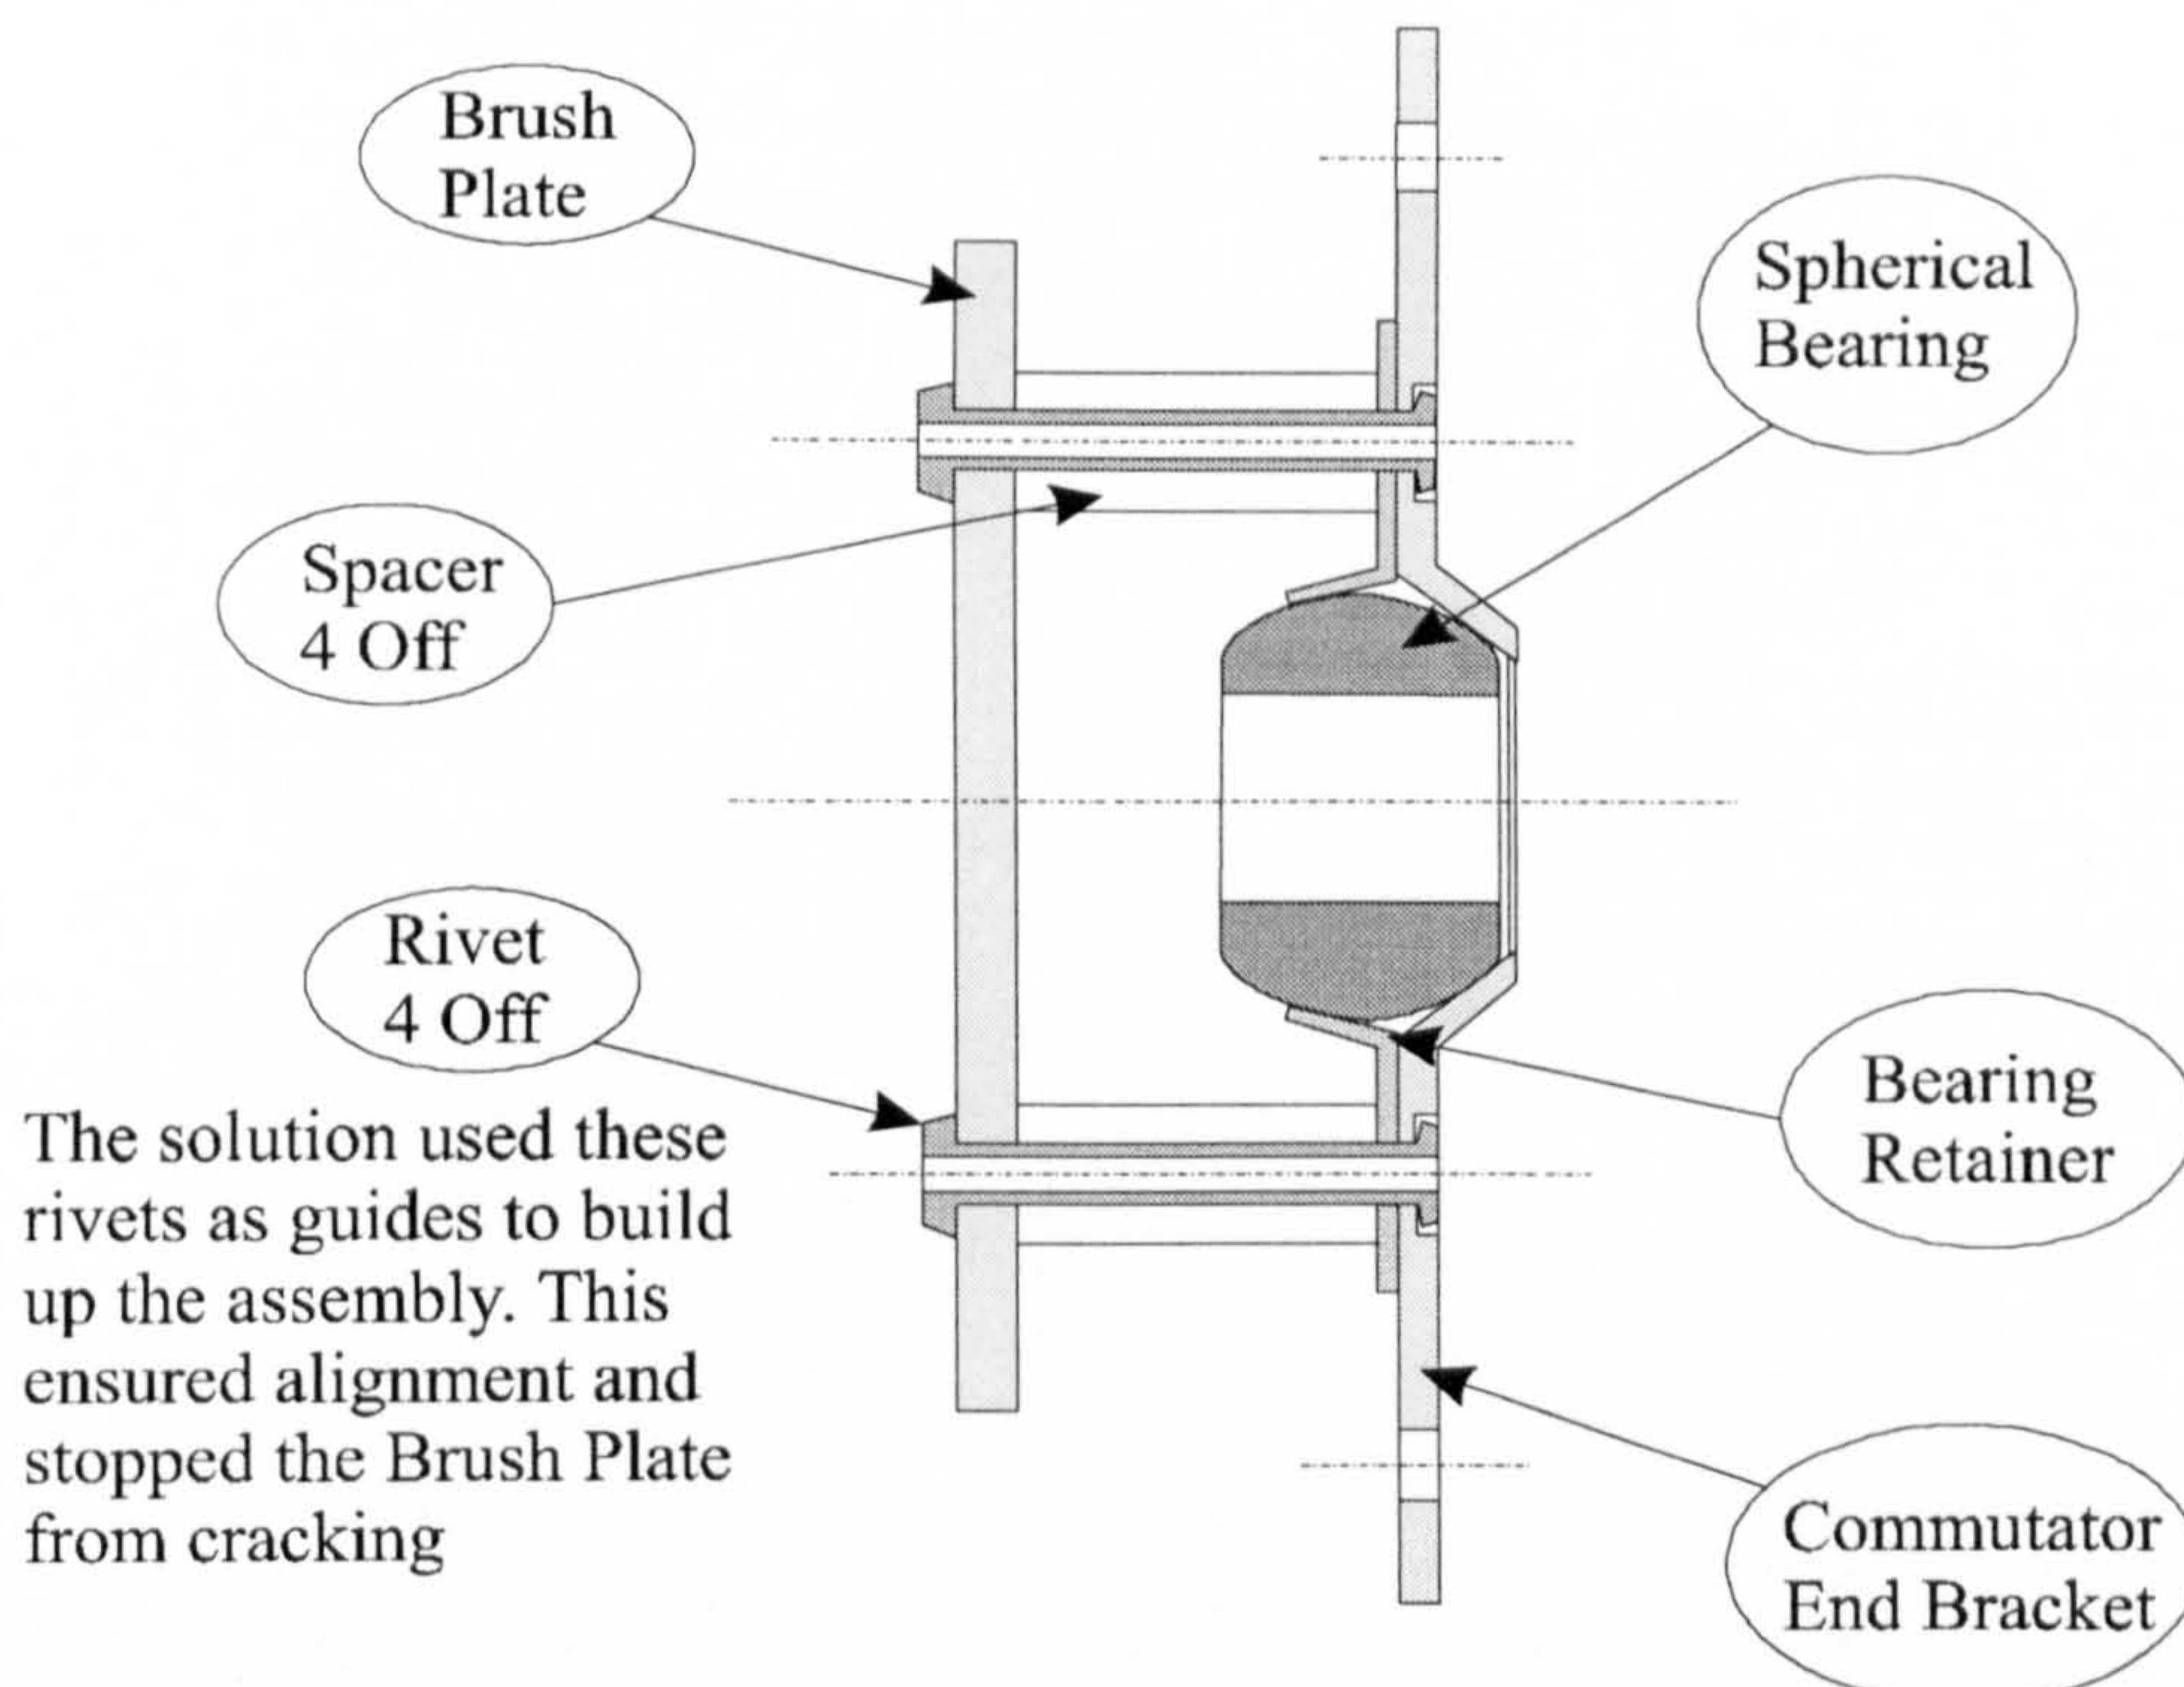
Partial Assembly Of Screen Wiper Motor, Showing Revised Design
